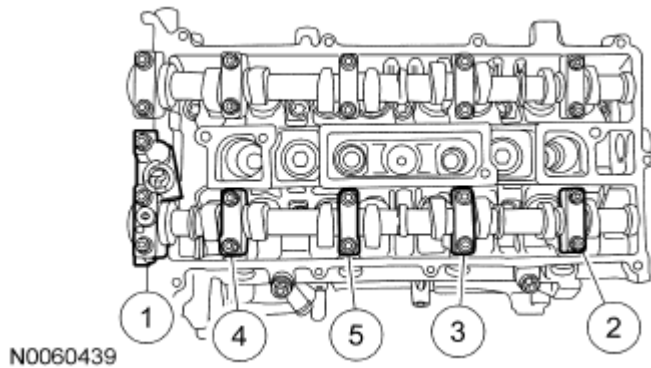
Identifying Intake Camshaft Bearing Cap Bolts Loosening Sequence
